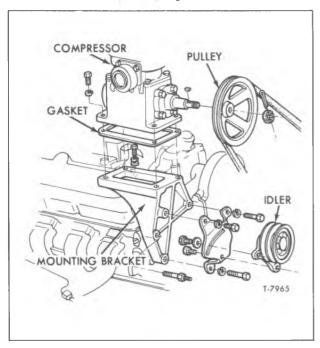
Air Compressor Installed (Typical Right Side Mount)
